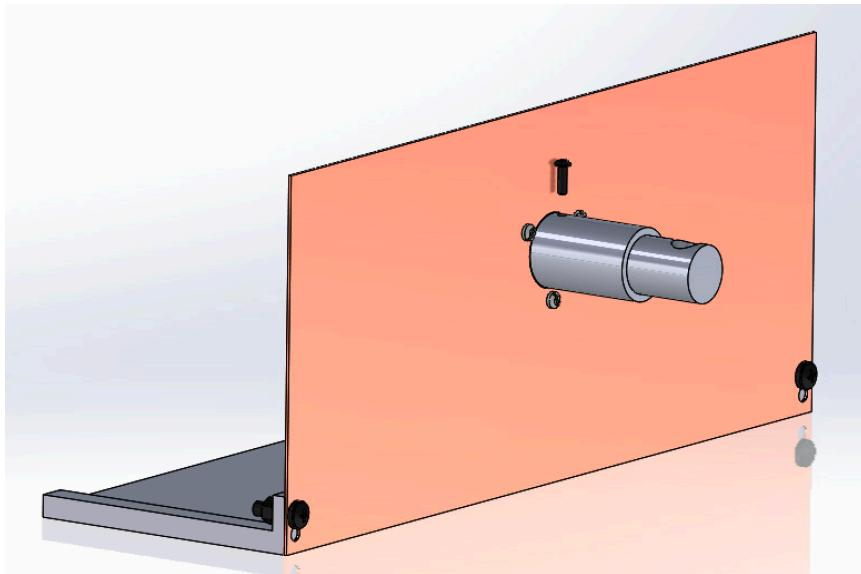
Motor to Driveshaft Adapter connected to motor via a M3 set screw
